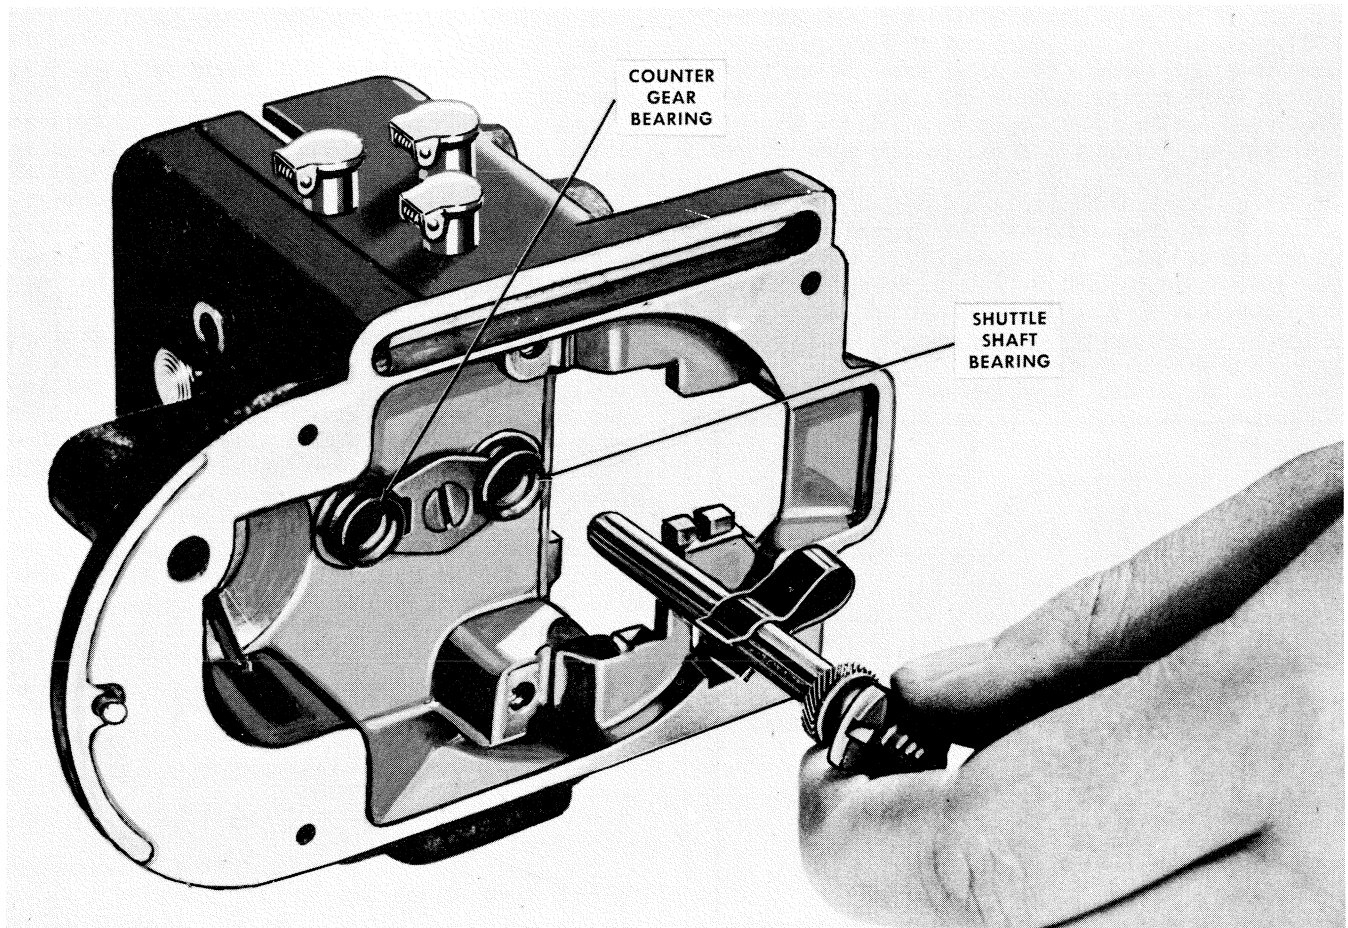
Reassembly of Counter Gear and Shuttle Shaft
